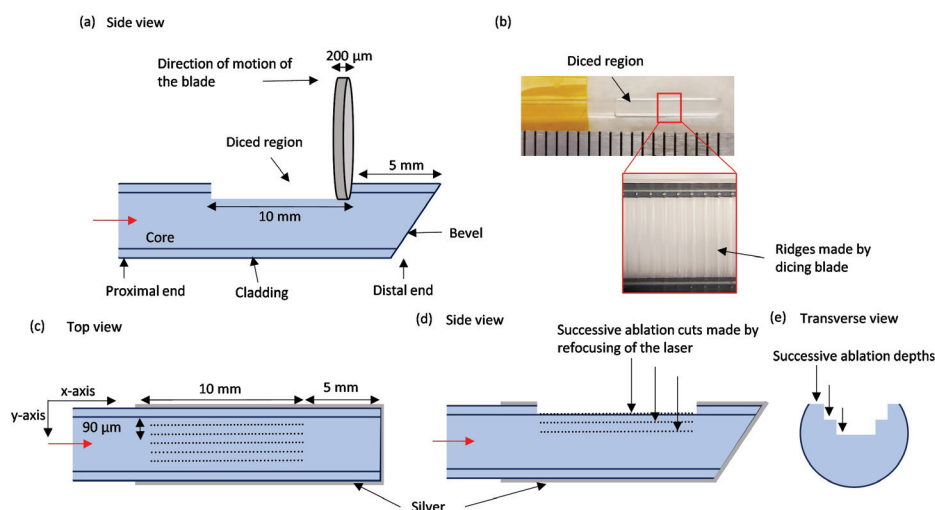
The micromachined side-fire optical fiber. (a) Side-view sketch showing the flattened region and beveled tip machined with a dicing saw. (b) A fiber before silver coating showing the surface ridges made by the dicing blade. (c) The top view sketch illustrates the laser ablation pattern along the length of the fiber (dotted lines). (d) A side view sketch illustrates the refocusing of the micromachining laser focus on ablating successive layers deeper into the fiber. (e) Transverse view sketch illustrating the successive ablations.
